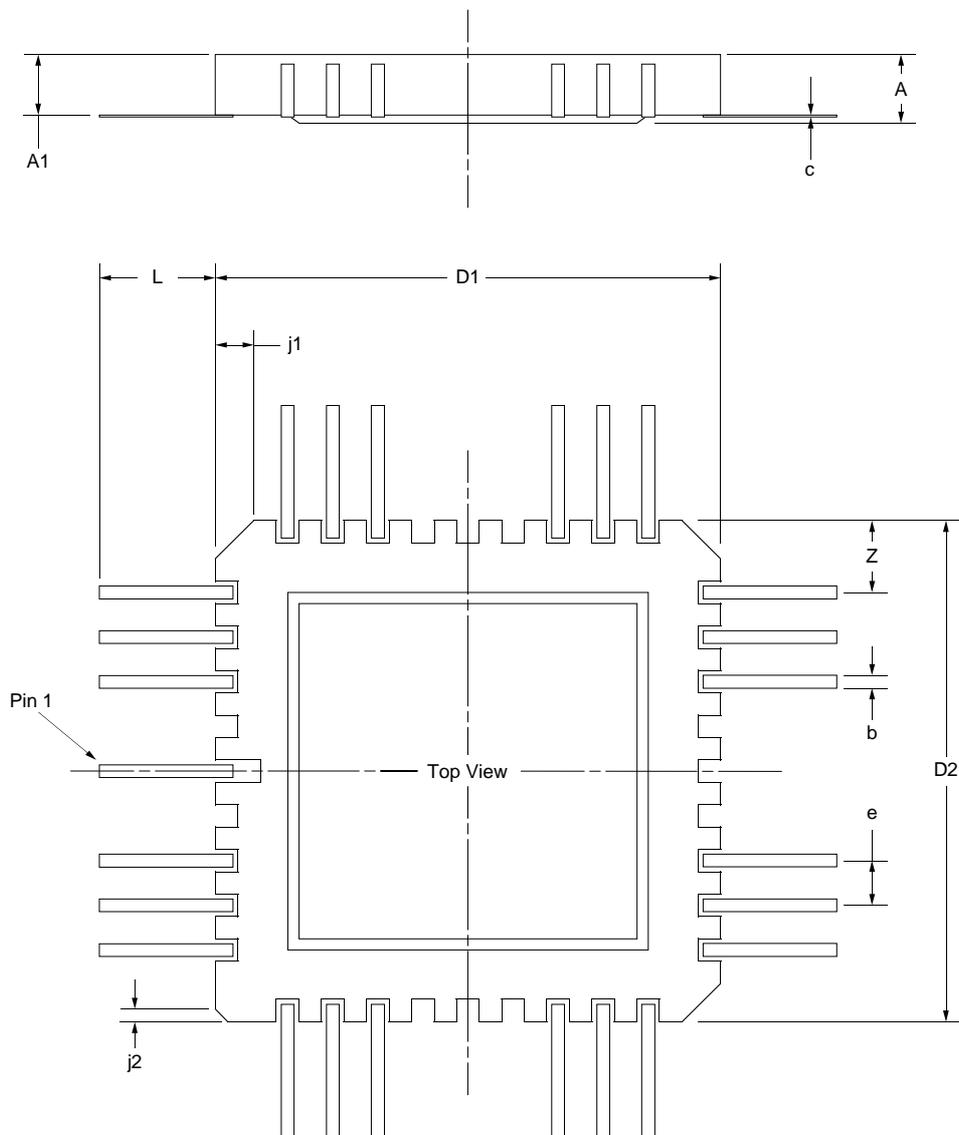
68-Lead Topbraze Flatpack - Package Style F
